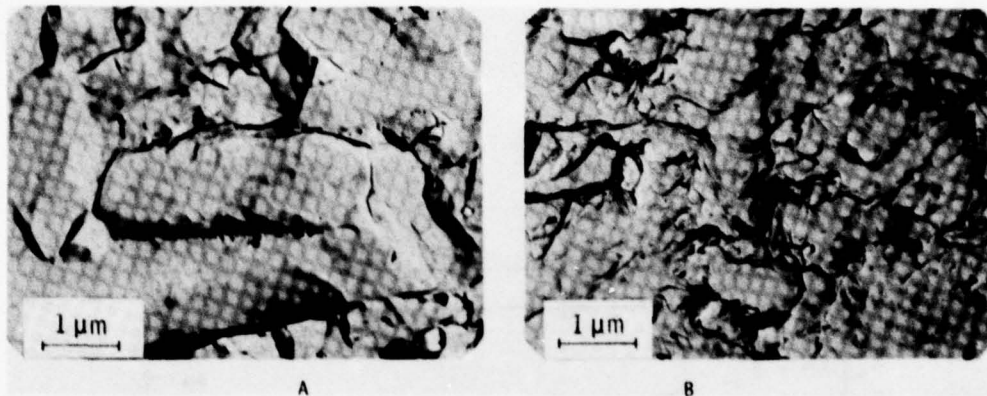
Fracture Surfaces, Fatigue Specimen, HS110 Material at a) 472°F and b) 2200°F
